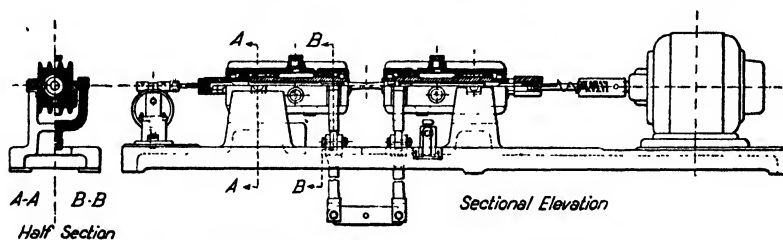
R. R. Moore rotating-beam fatigue machine.
